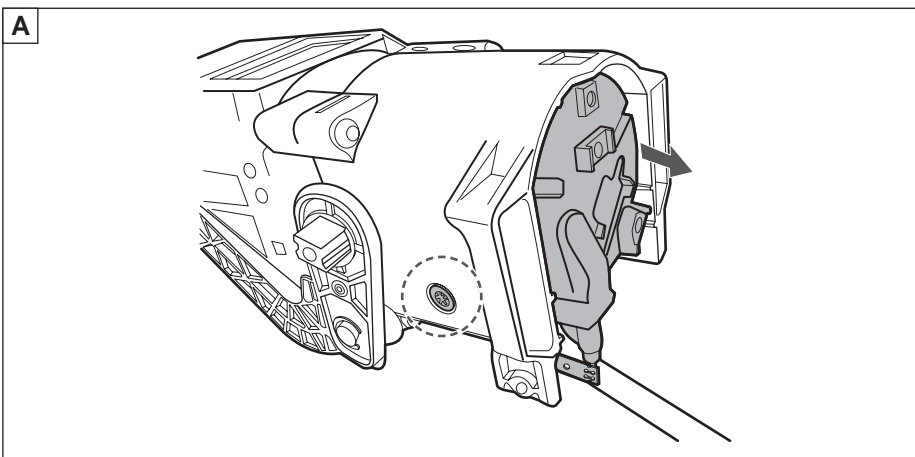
Figure A: unscrew the fixing screws of the thermoblock (one on each side) and extract the component.
